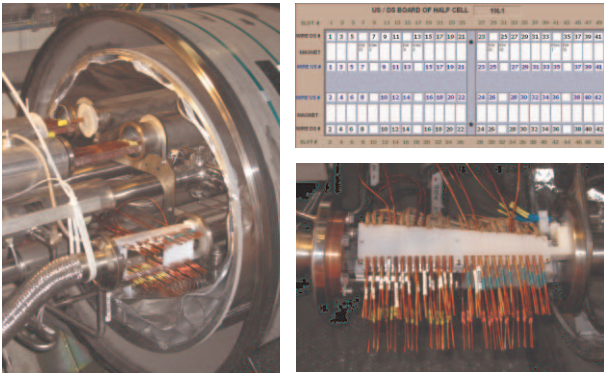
Left: Position of the interconnection board in the interconnection region between SSS and MB. Bottom right: Interconnection board assembled and awaiting test before ultrasonic welding. Top right: Slot assignment on the interconnection board.
